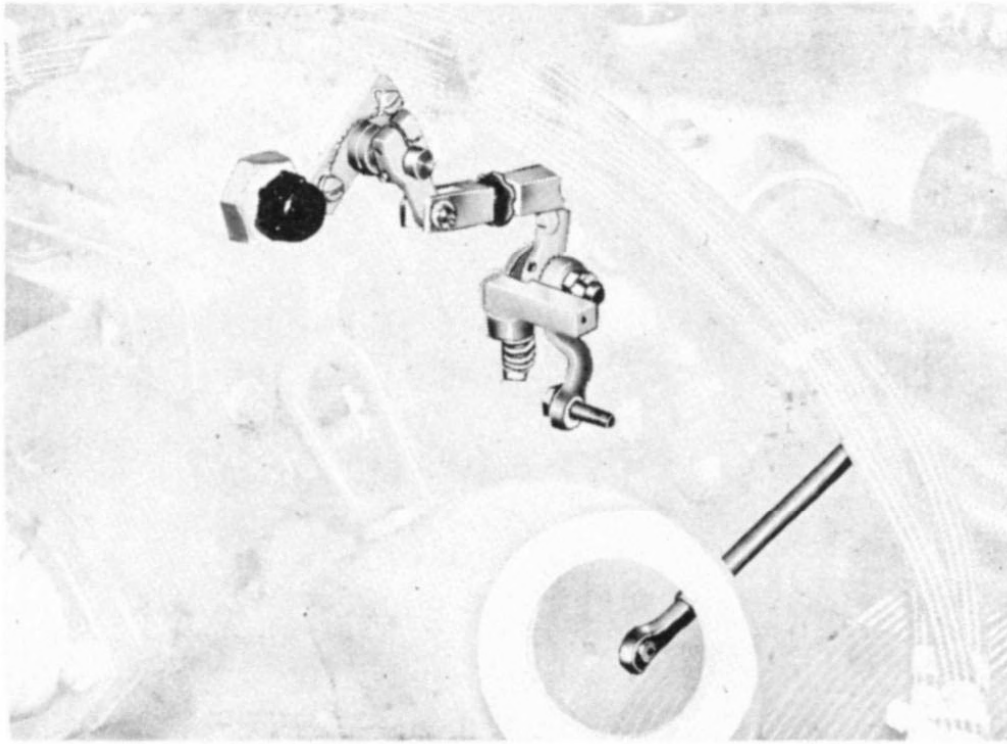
Obtaining Clearance of Throttle Lever in Closed Position
